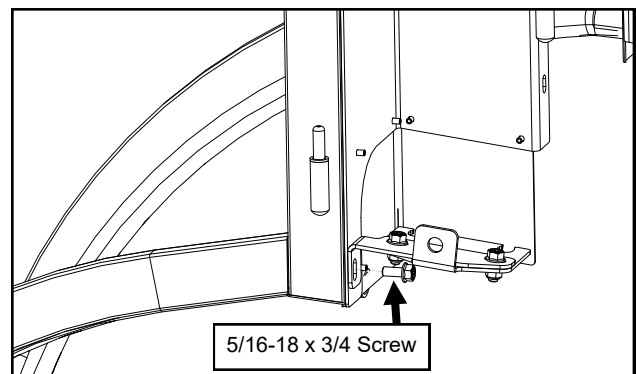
(Rear Mount to Side Frame Fastener)
